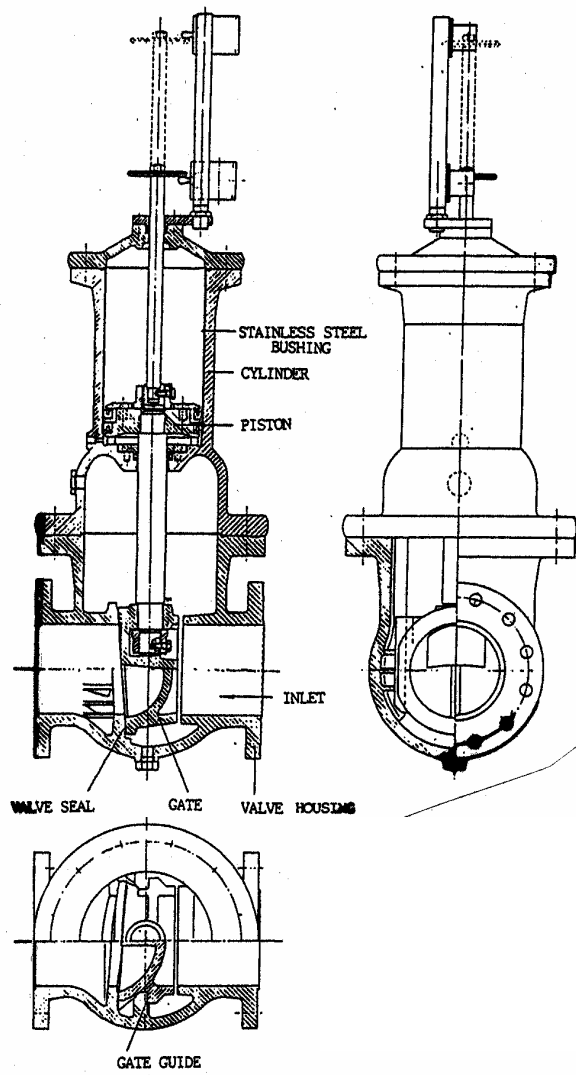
Gate valve with double acting hydraulic cylinder
